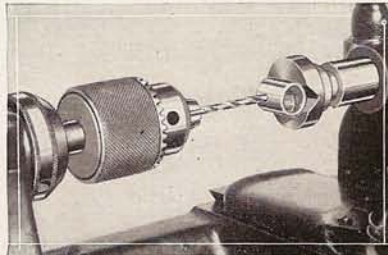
Drilling an Oil Hole in a Bushing Held in a Crotch Center.
